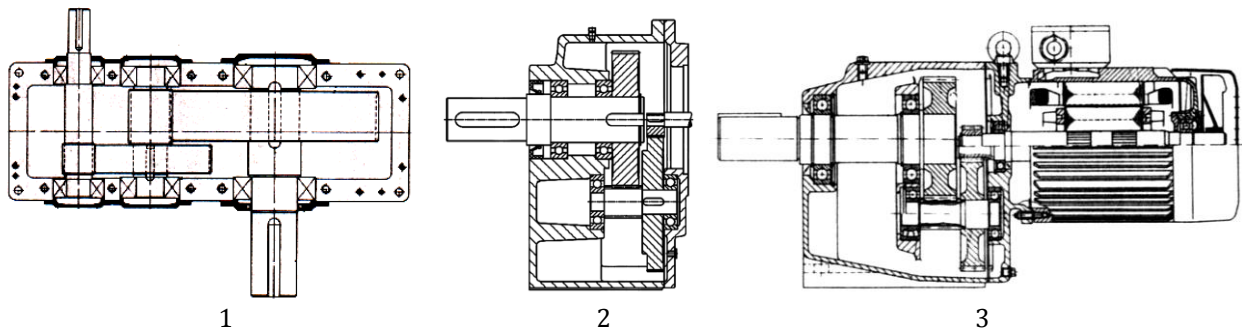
Characteristic solutions of (1) gear reducer with parallel shaft (Santasalo), (2) axial shaft (Bege) and (3) almost-axial shafts (KEB).
